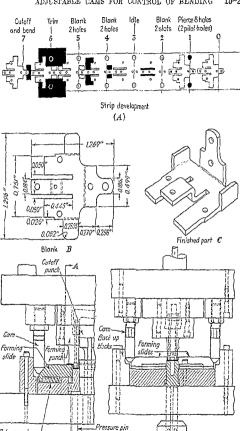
Adjustable cams control bending: (A) strip development; (B) blank; (C) finished part; (D) end forming slide; (E) side forming slides.5
